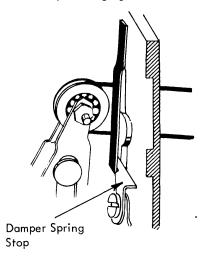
Damper, Spring Stop - Preliminary Adjustment
